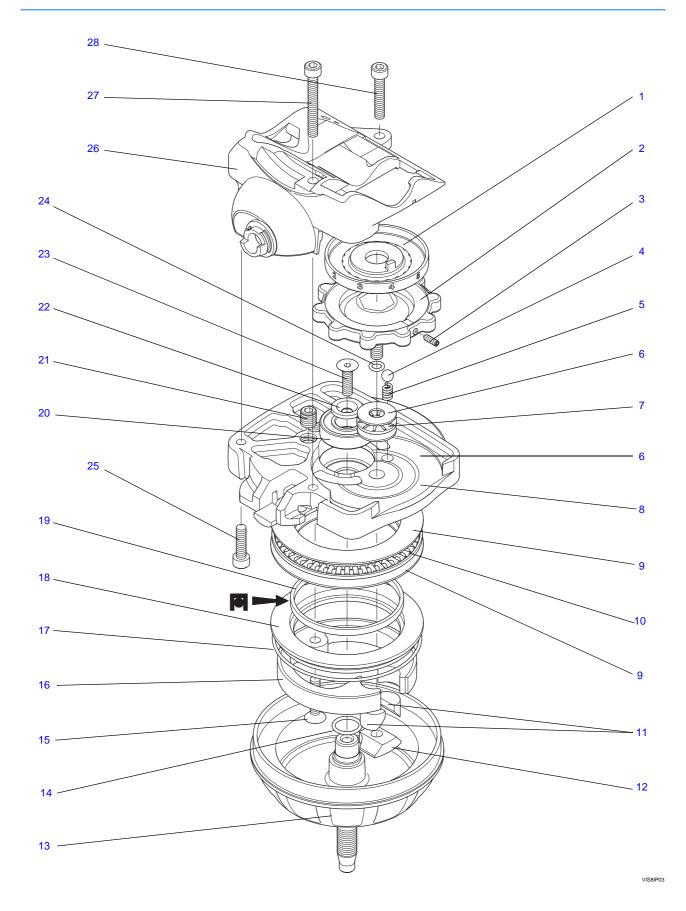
Vision 8 (Black) Pan and Tilt Head - Pan Unit Assembly
